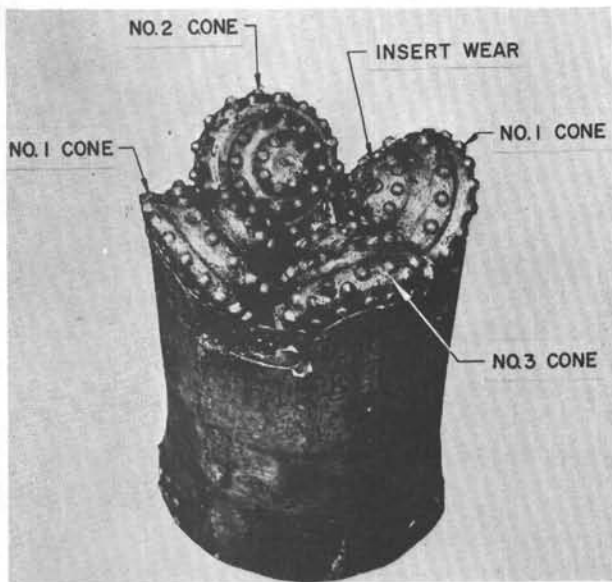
Four cone tungsten carbide roller core bit, Type 4.
